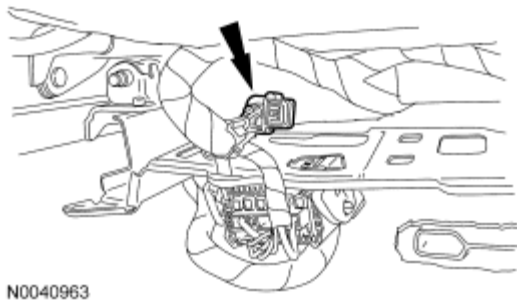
Locating Driver Seat Side Air Bag Module Electrical Connector
